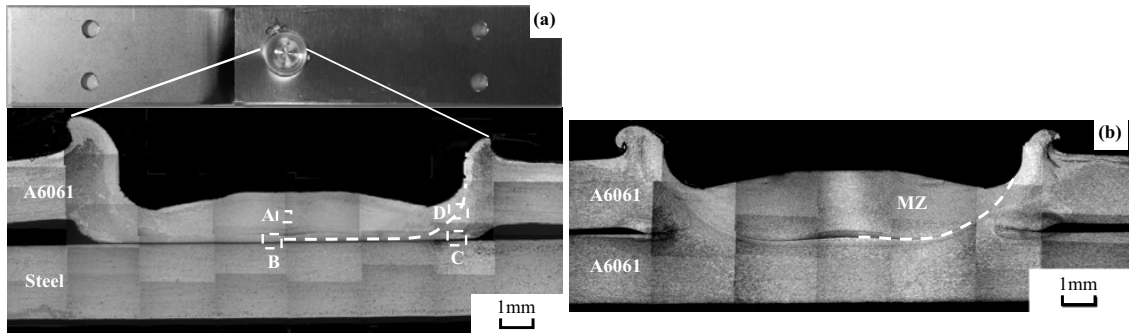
Macroscopic appearance of the cross section of weld zone: (a) A6061-Steel, (b) A6061-A6061
